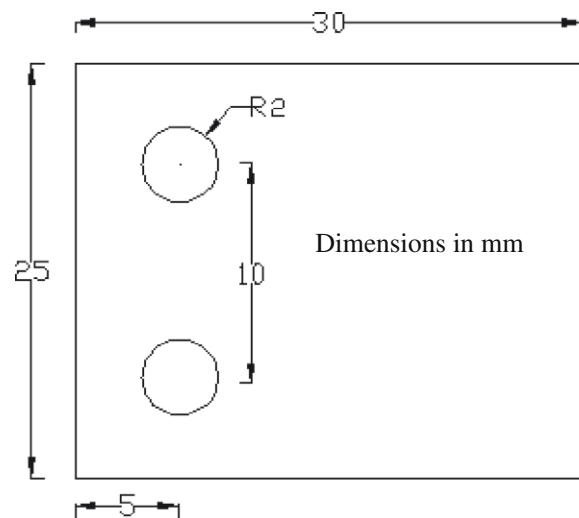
Details of holes in the sectioned flat portion of the leaf spring.
